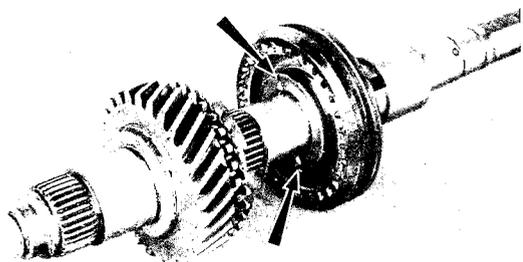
A-45 Installing clutch hub assembly (1st & 2nd)
